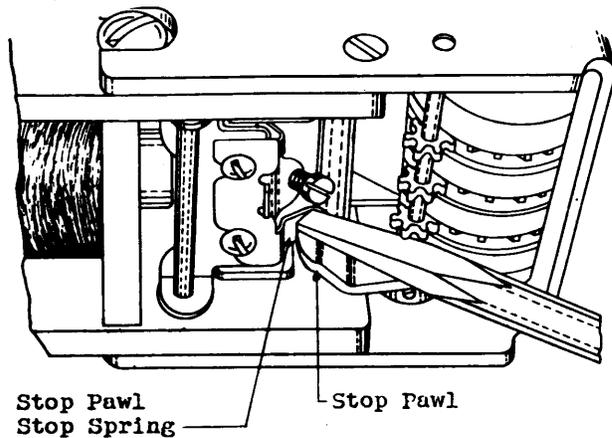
Method of Adjusting Stop Pawl Stop Spring for More Clearance
